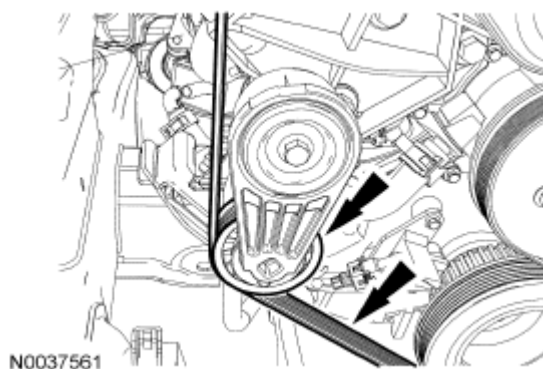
Identifying Accessory Drive Belt Tensioner And Accessory Drive Belt
